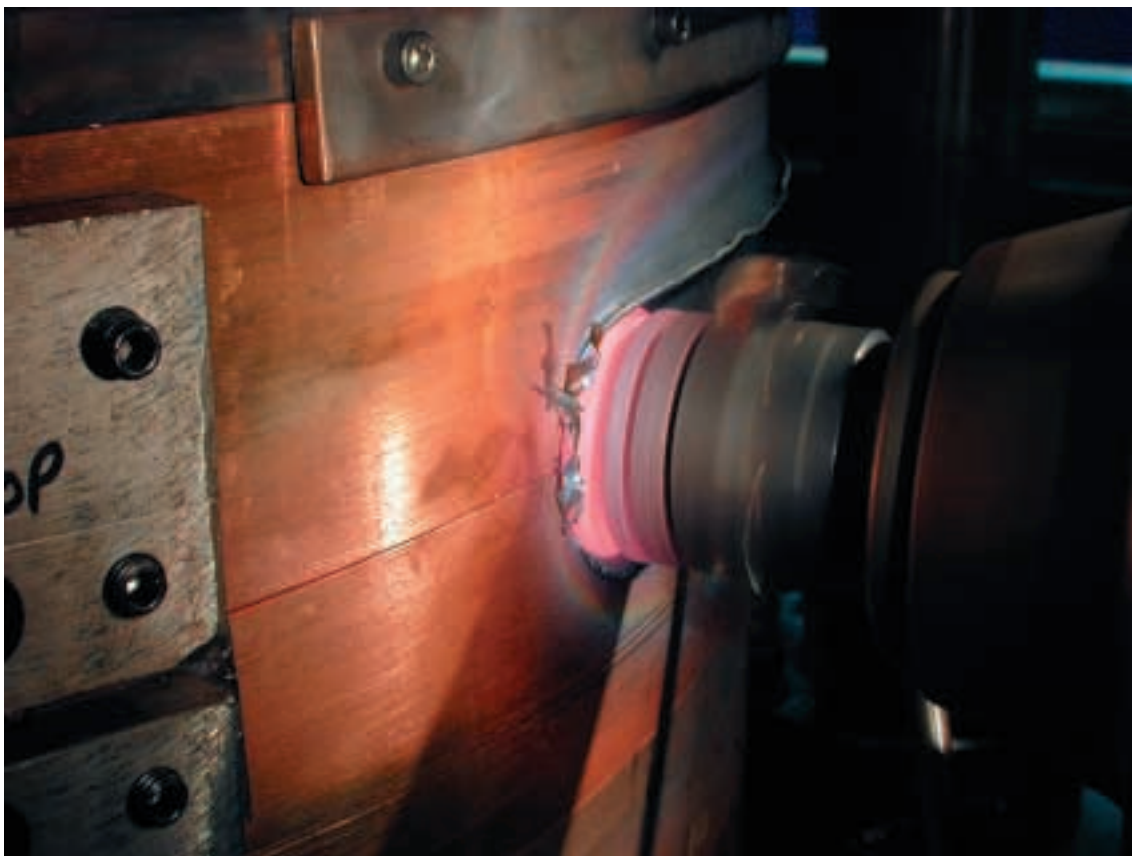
Welding by FSW in the laboratory machine at TWI.
